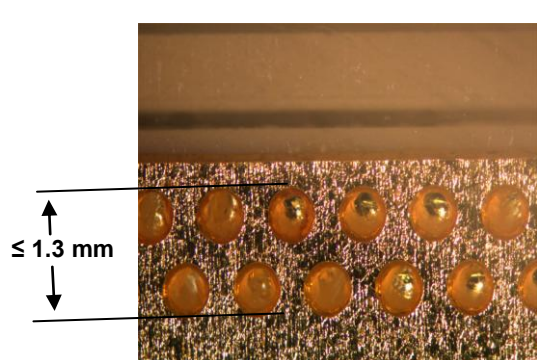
Dimples in the MiniSKiiP® bottom surface
